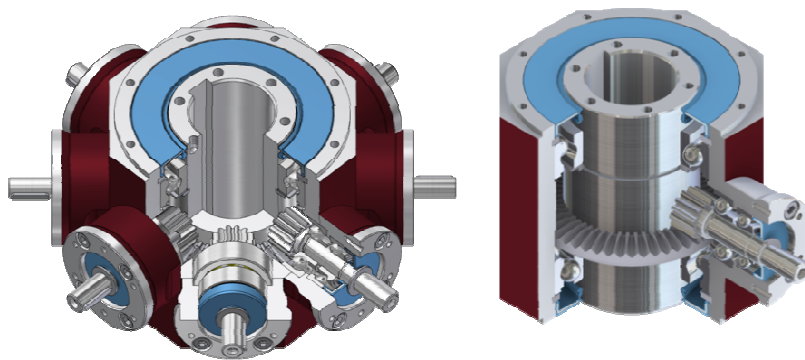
Block shaped 1:1 and flat 1:5 versions of the EVOLVERE angular gearbox family
